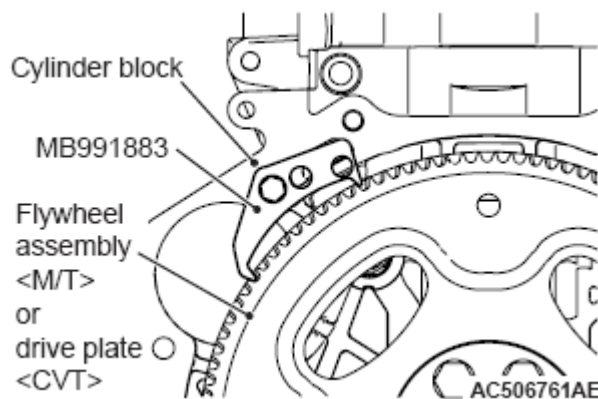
Fixing Flywheel Assembly Using Special Tool
